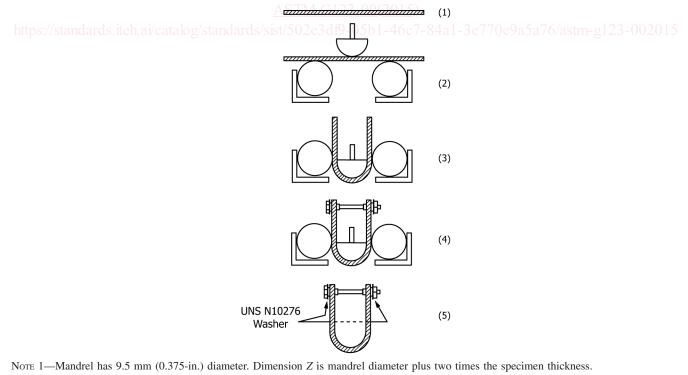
Suggested Stressing Fixture (fastener inserted while specimen in die)
